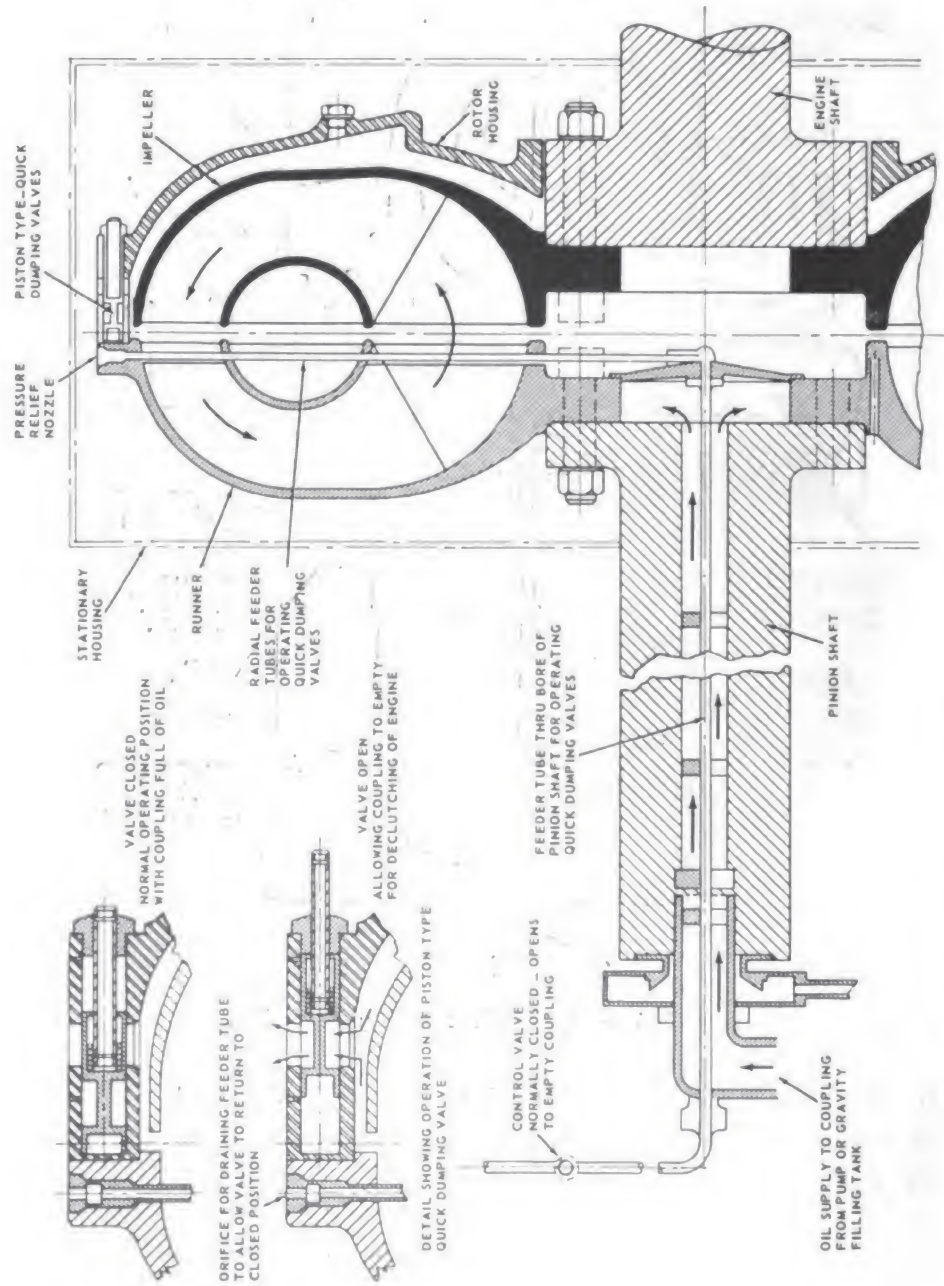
Hydraulic-coupling with piston-type quick-dumping valve.
